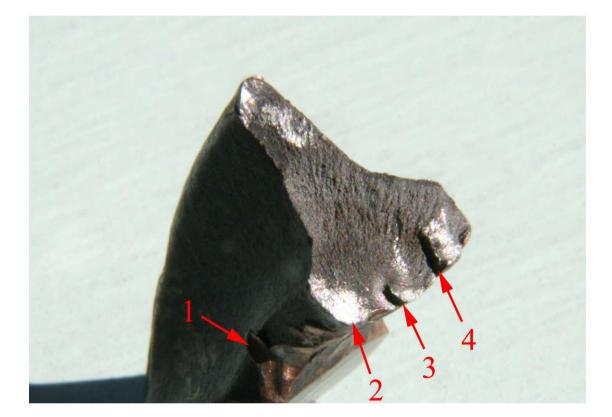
Fracture surface on the detached piece of rocker tip. Arrow 1 indicates a set of gouges. Arrow 2 indicates an area of polishing on the fracture surface. Arrow 3 and arrow 4 indicate surfaces which correspond to extensions of the two grooves shown in figure 5.
